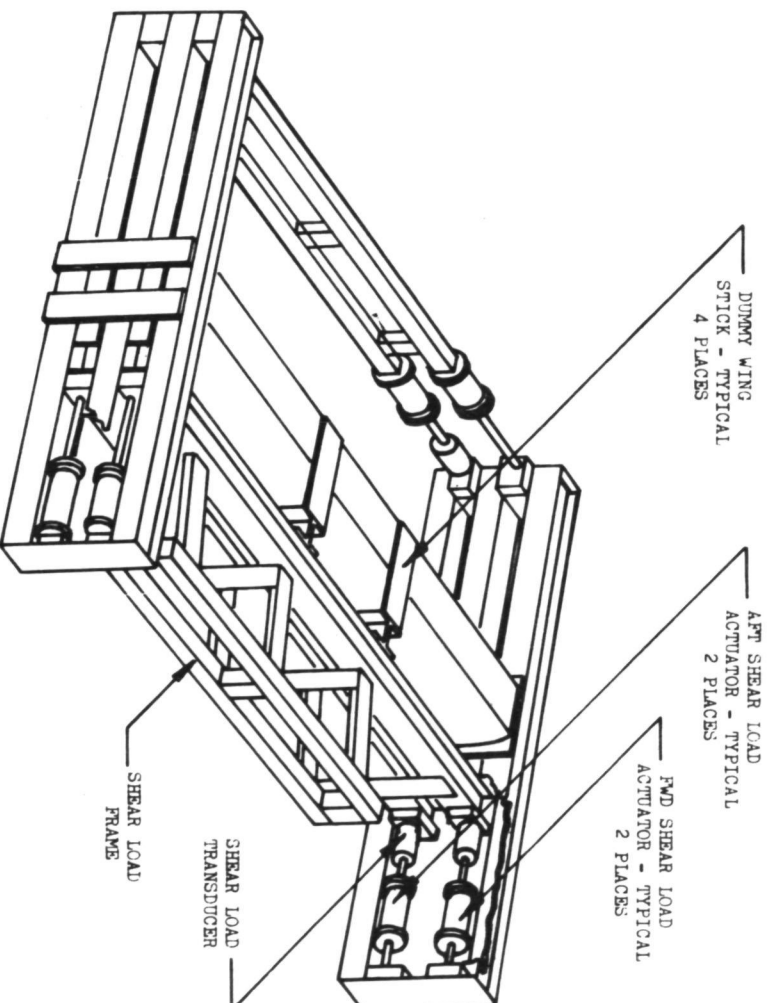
ILLUSTRATION OF TEST FIXTURE WITH SHEAR LOAD FRAME IN PLACE - ONE MOMENT LOAD FRAME HAS BEEN OMITTED FOR CLARITY
